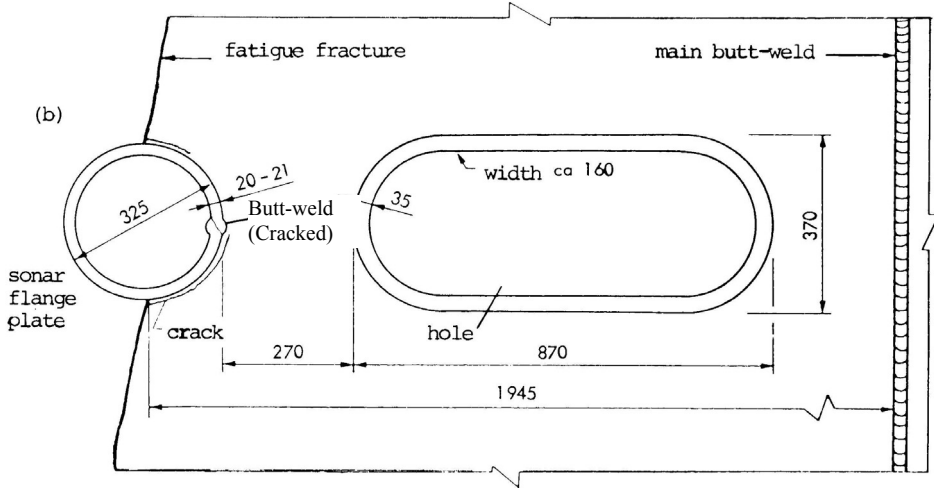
Crack initiating in a fillet weld of sonar flange plate and ending in cracked butt weld. The position of final fatigue fracture is indicated
